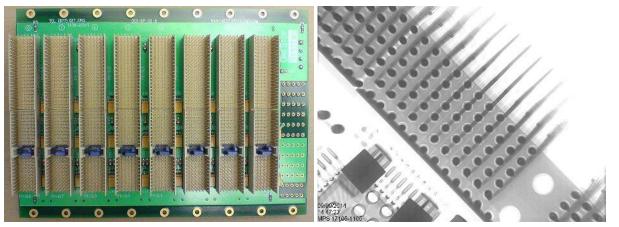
Multiple 132-pin cPCI connectors mounted in HDI backplane assembly (left), and X-ray image of complete PTH fill (right)
